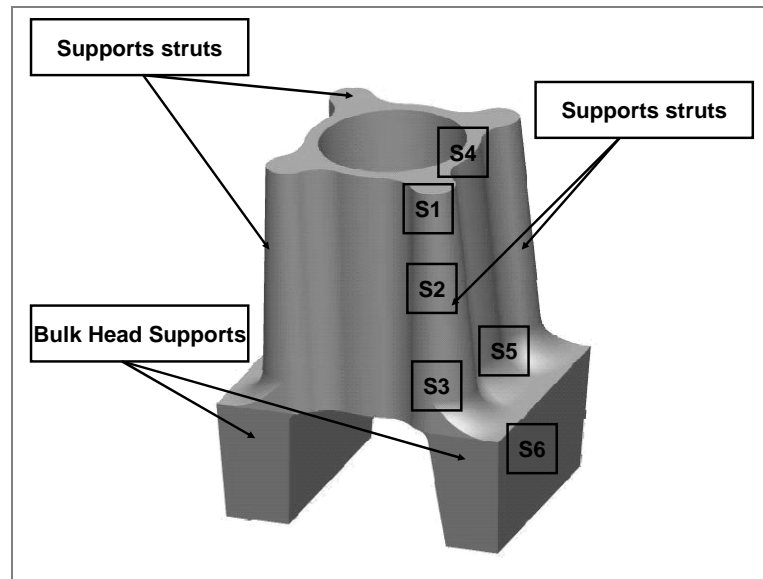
CAD geometry of the casting showing the sectioning scheme for metallurgical investigation and zones where tensile specimens were machined out.
